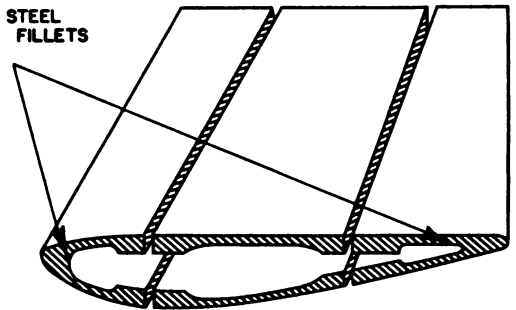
Welded hollow blades—type I—forming operations.
